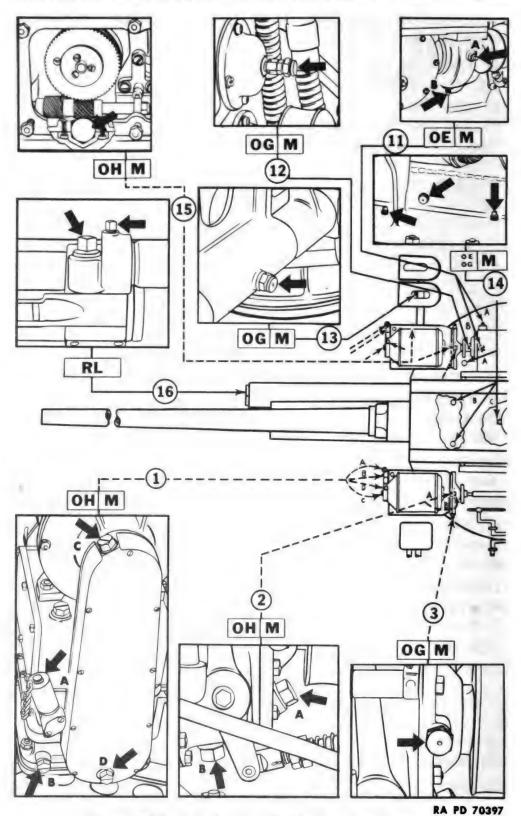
Lubrication Guide for Top Carriage (Balance of illustration on opposite page)
